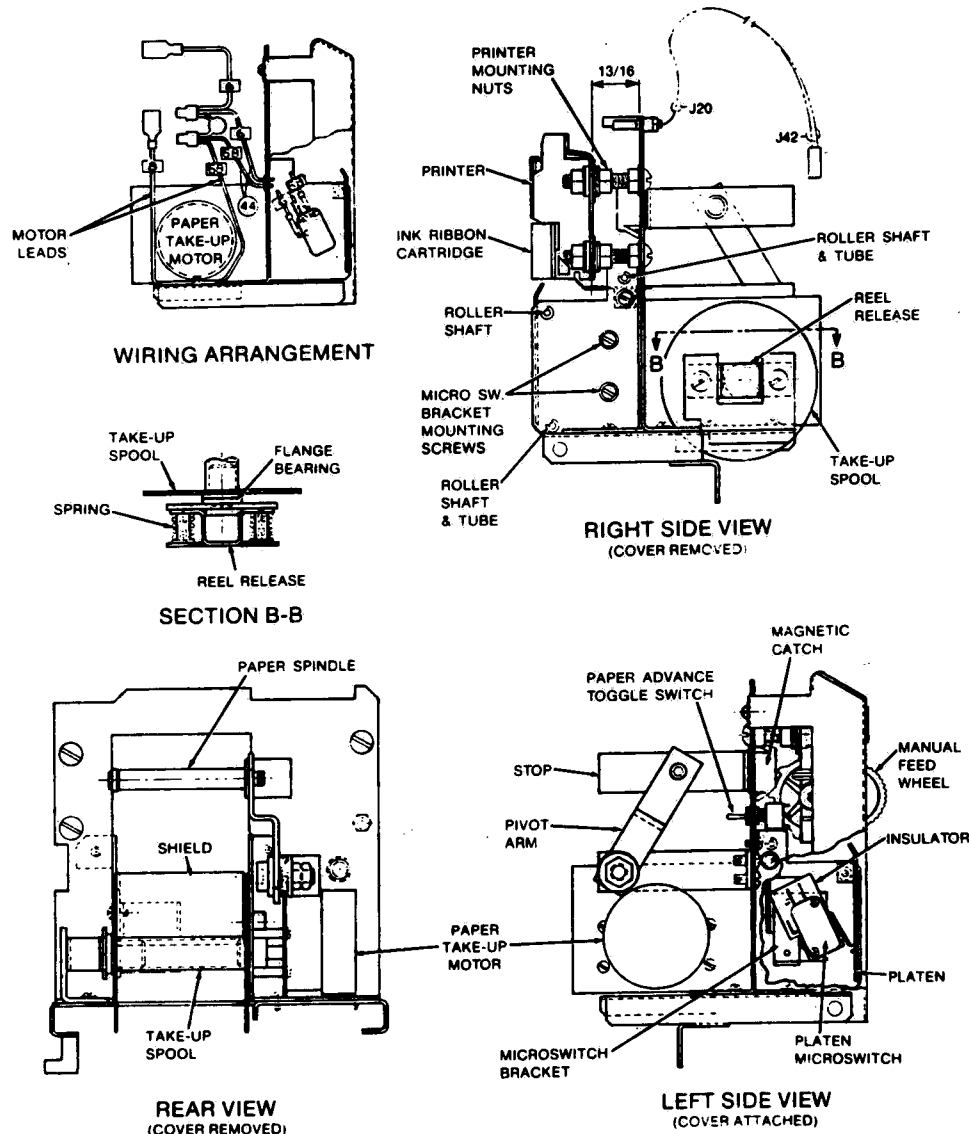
A. PRINTCON PRINTER ASSEMBLY (Units After 6/85).
